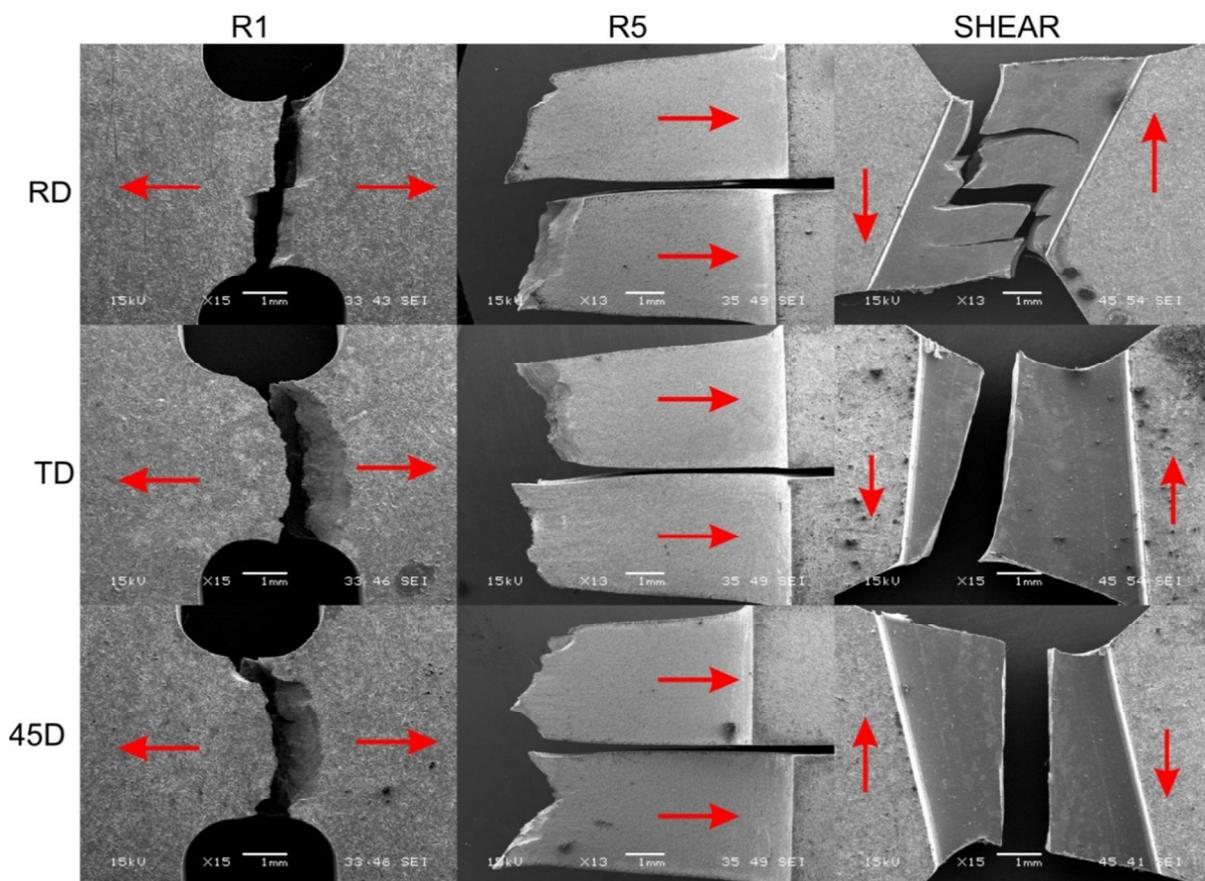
View of the specimen fracture region obtained at various geometries and loading directions
